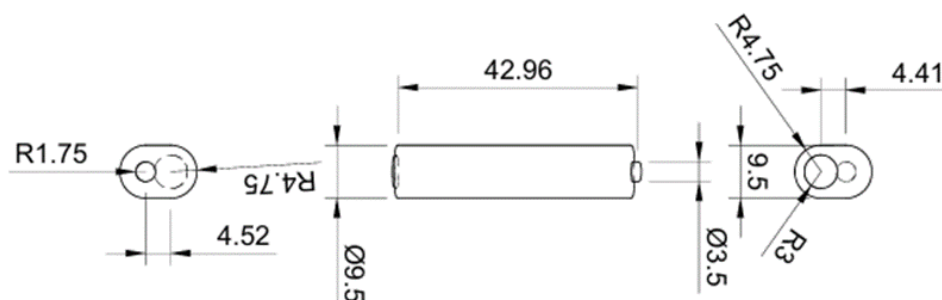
Primary Battery CAD Drawing and Dimensions Part 4
